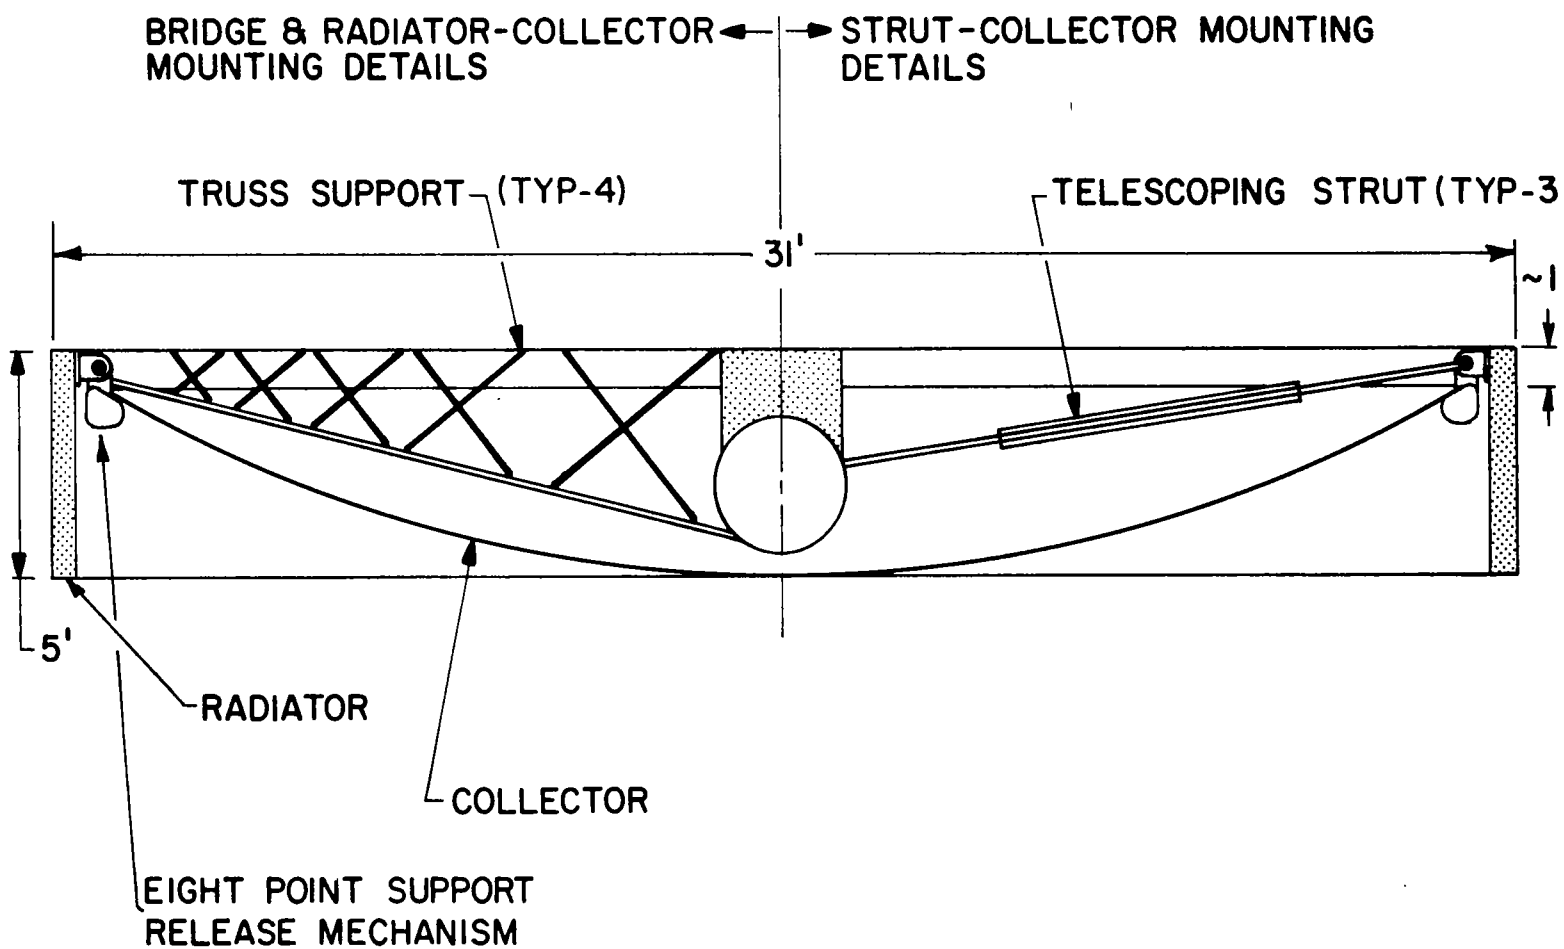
COLLECTOR-RADIATOR MOUNTING DETAILS
